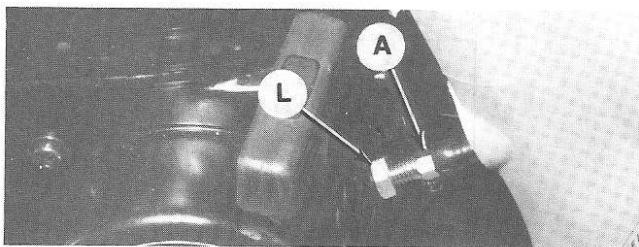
Loosen locknut (L) and rotate adjuster (A) as outlined in text to adjust starter interlock.
